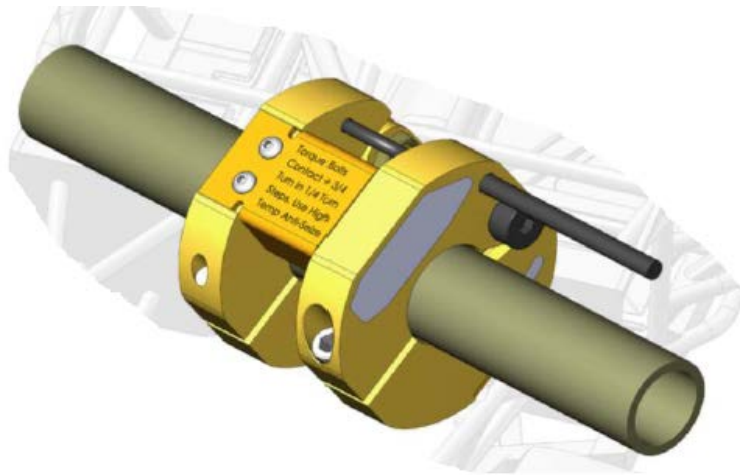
Steering Wheel Torque Sensor (Courtesy: Raetech Motorsports).
